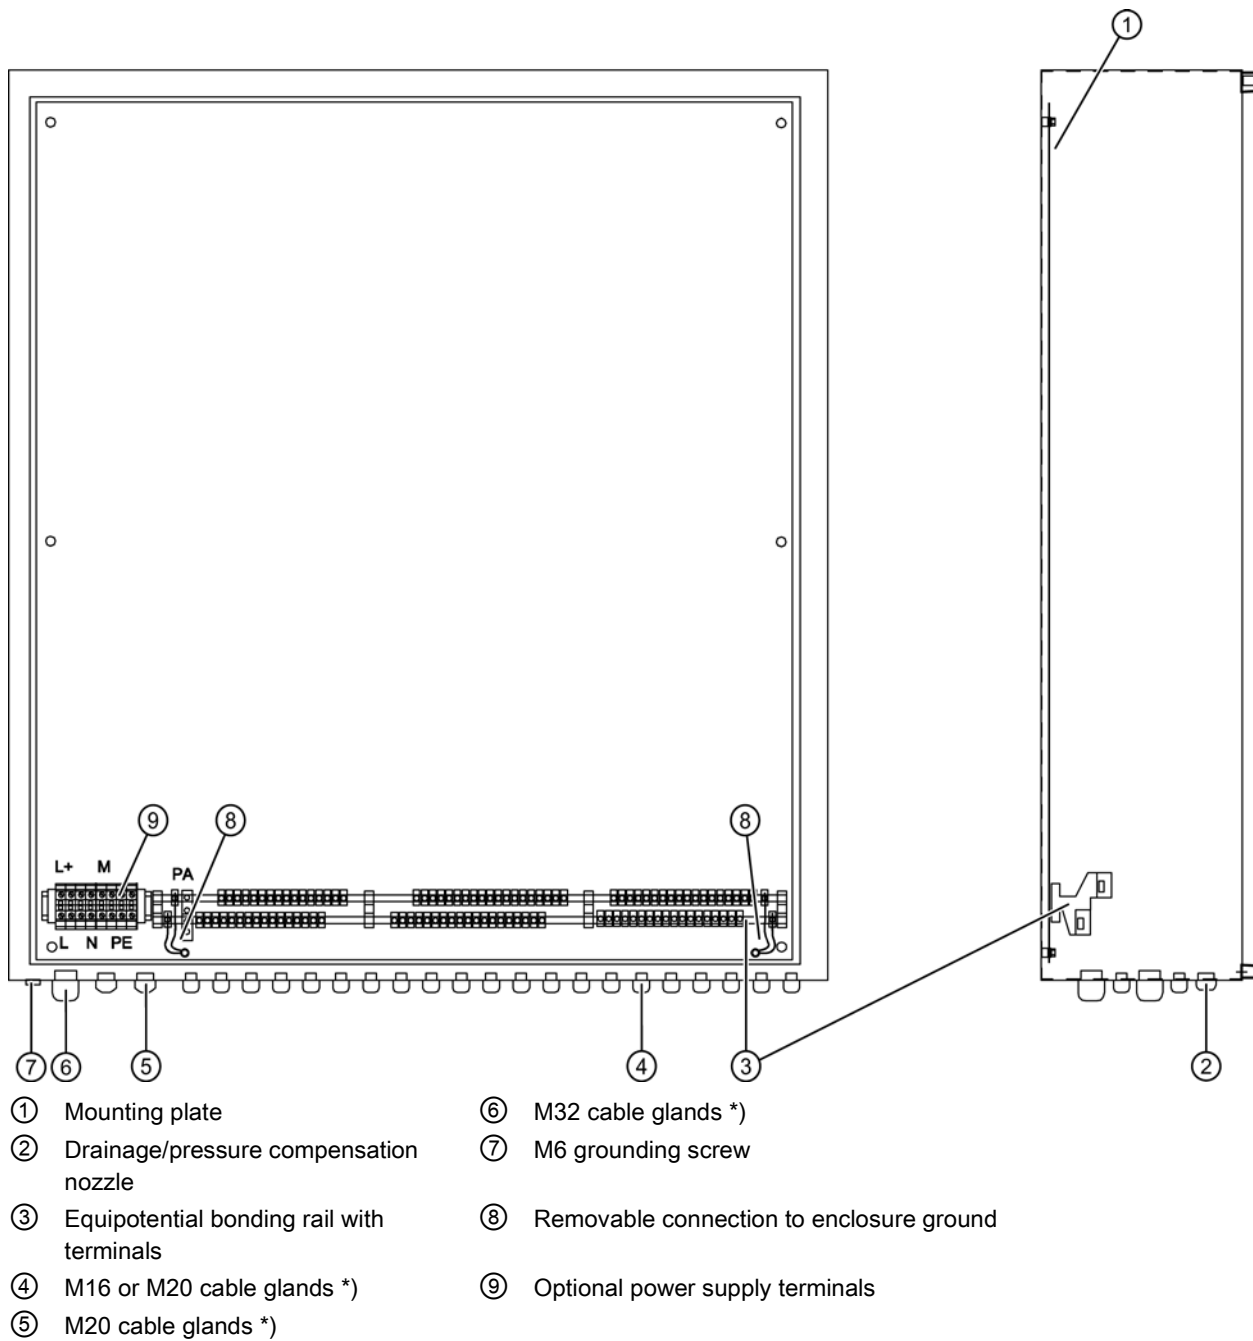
Standard enclosure 6DL2804-0xH...Wxx, view 2
